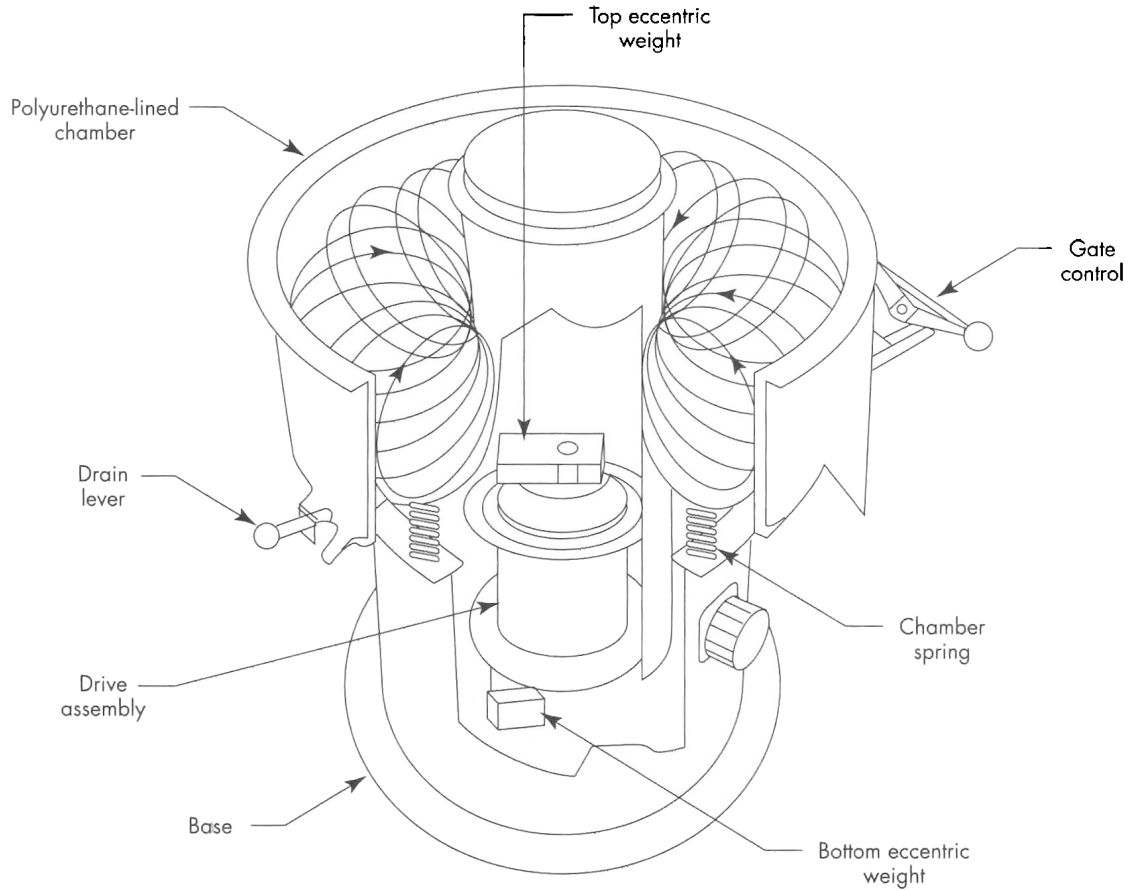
Motion of parts and media in bowl-type vibratory tumbler [5]
